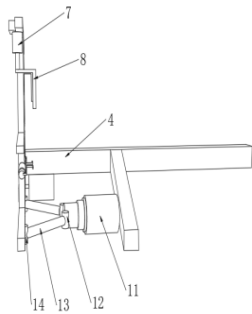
Corner pieces of automatic door opening and closing technology for boxes
